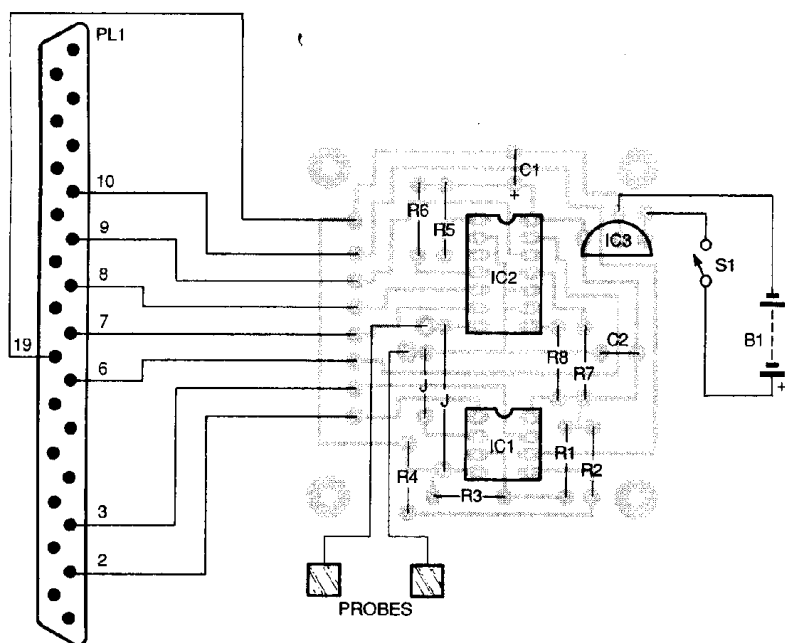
Here's where the components are located on the PC board. Single-sided board design makes assembly easy—there is no worry about placed-through holes or solder connections on the top side of the board.
